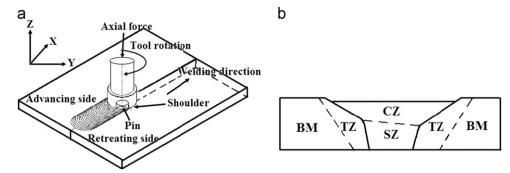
Schematic drawing of friction stir welding process (a); (b) distinct regions in the FSW joint.
